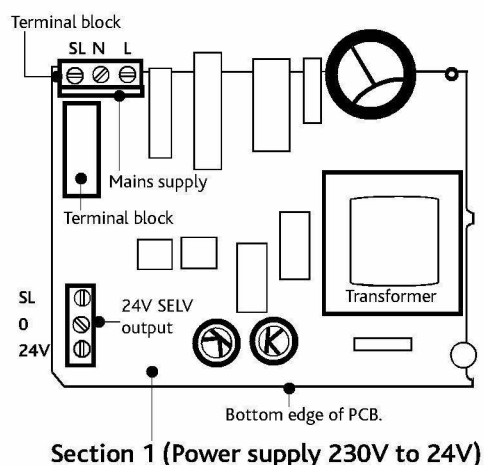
Section 1 of PCB will be installed into the transformer enclosure after the 24V wiring has been completed.
